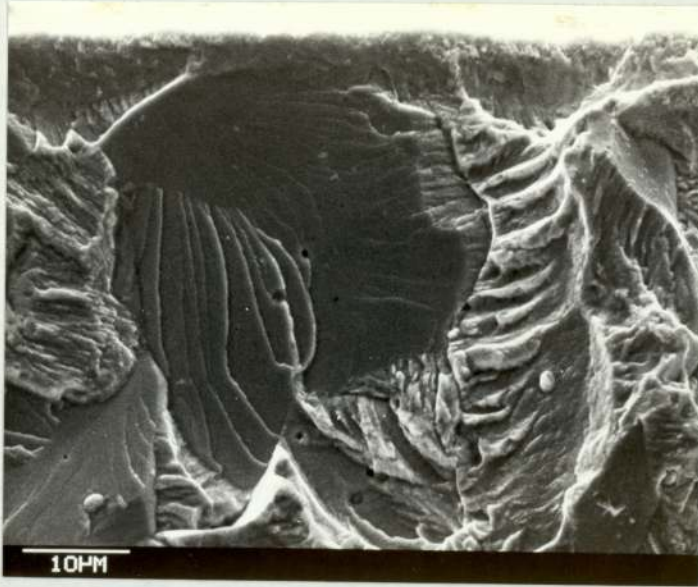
Fatigue fracture in the nitrocarburised
